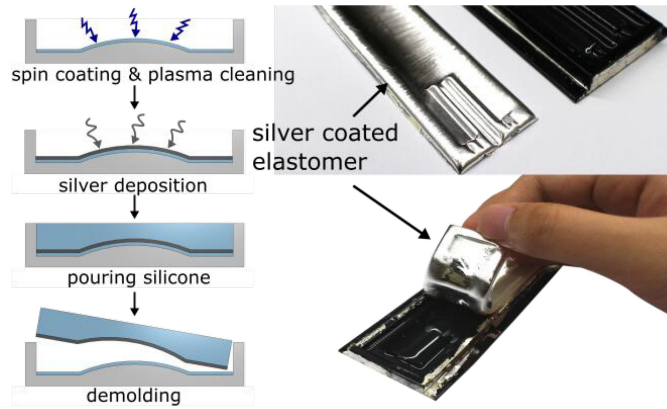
Schematic of the fabrication process of silver layer(Left), demolding the elastomer with metal layer from the mold (Bottom-Right), Completely fabricated metal layer on the elastomer surface (Top-Right).
